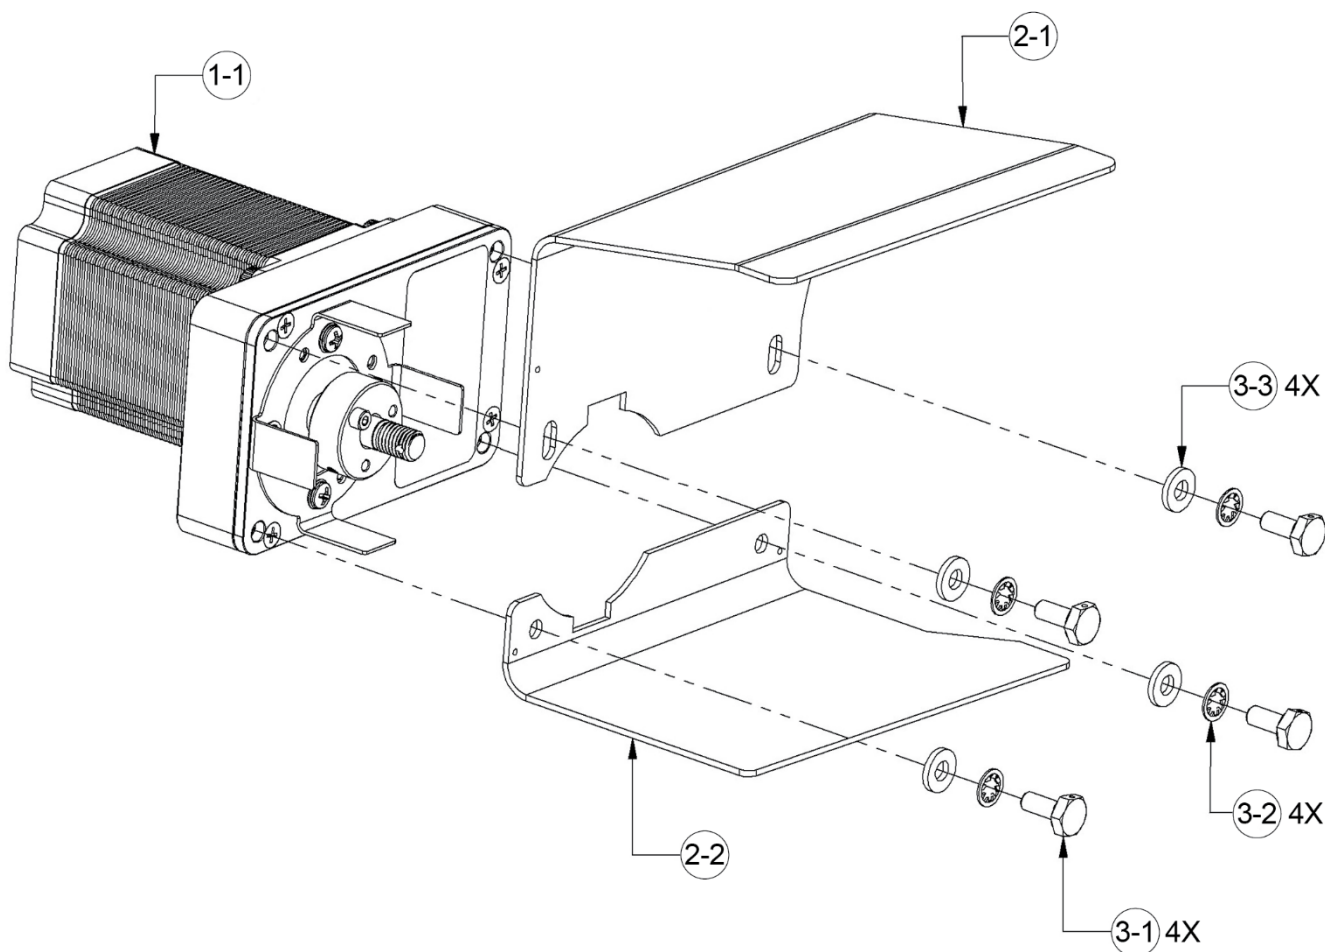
Attaching Upper and Lower Brackets to Roll Servo
